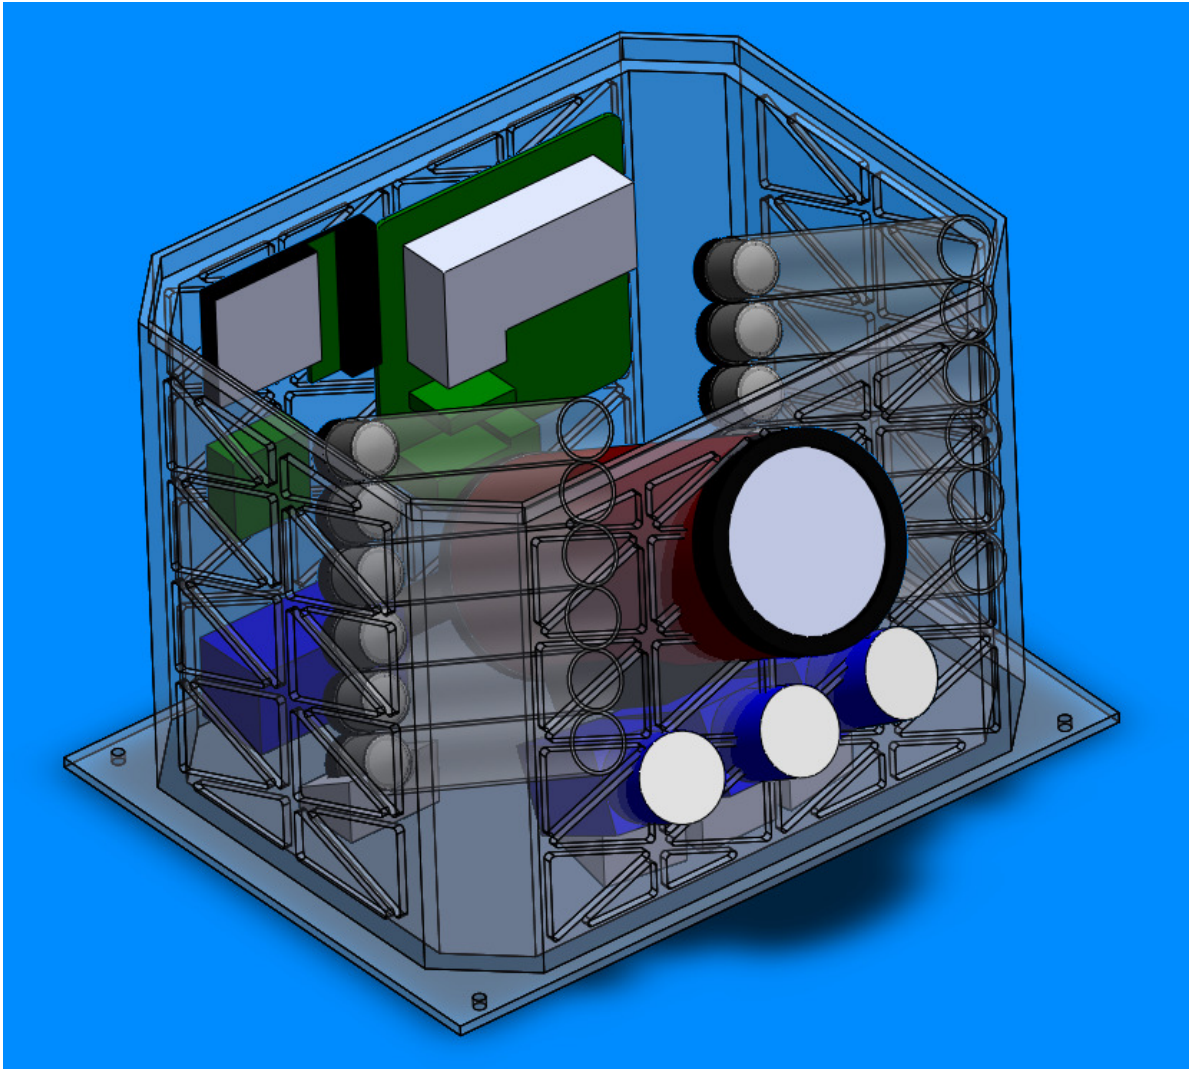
An isometric view of a volumetric drawing of the BOWSER payload.
